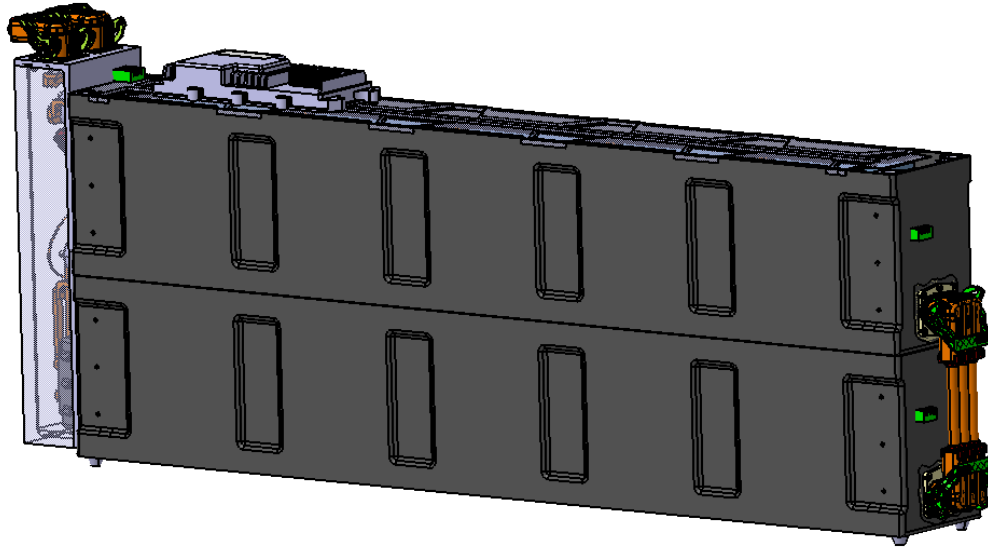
Packaging Design - Complete Battery Pack Left Side View
